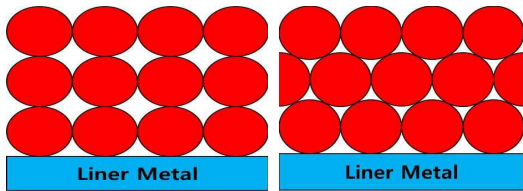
Aligned winding (left) and staggered winding (right) for dry hoop wrapping of metal wires
